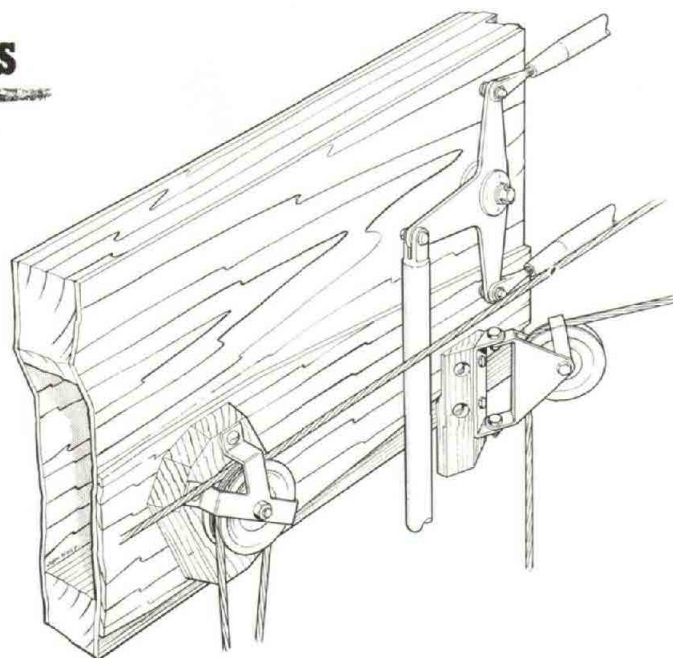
Aileron, rudder and air brake controls in the Fauvel AV-36 sailplane, mounted on the back of the main spar.
